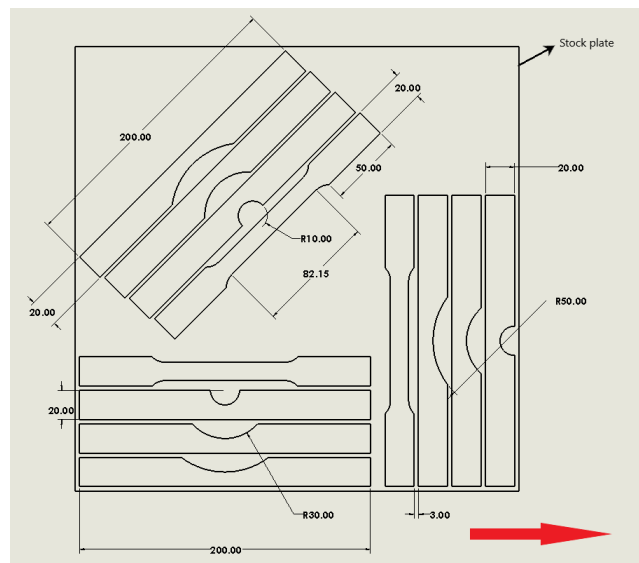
SolidWorks drawing of tool path used in wire EDM, rolling direction is represented by the red arrow, tensile and single notched specimens (10mm, 30mm and 50mm radii) were cut in three orientations.
